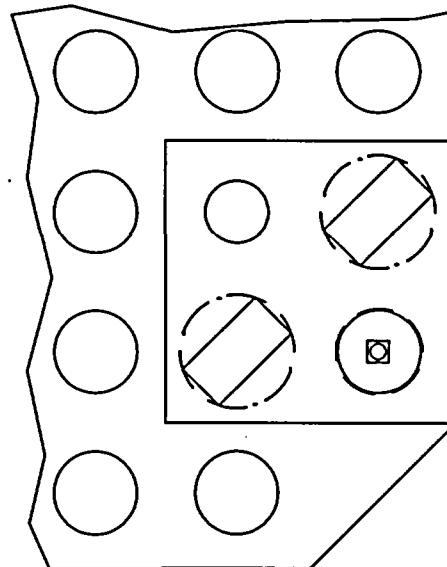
; ELEVATION VIEW OF STORAGE RACK MODULE
